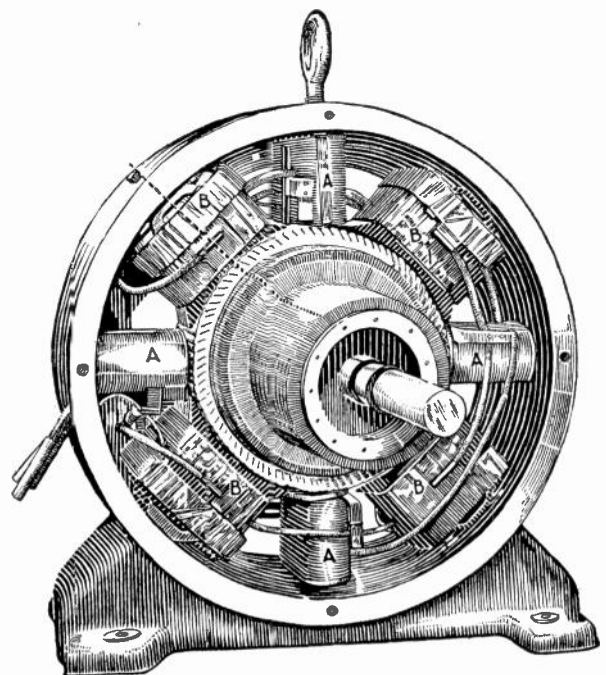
This view of a D.C. generator with the front bearing bracket removed shows the field poles, armature, and frame very clearly.
